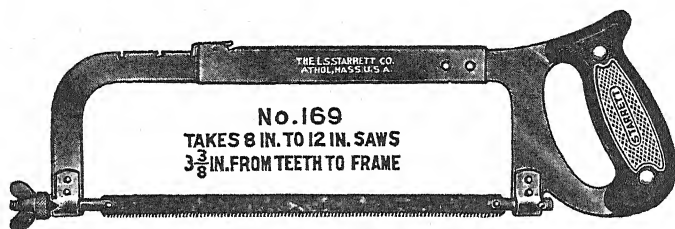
The Starrett Hand Hack-Saw Frame No. 169.
